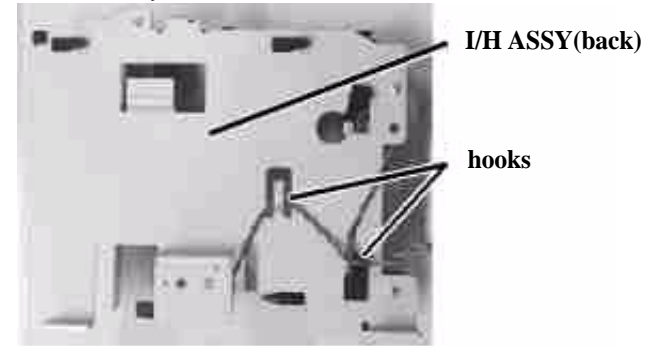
Removing the Ink Sensor Assembly 1/3
